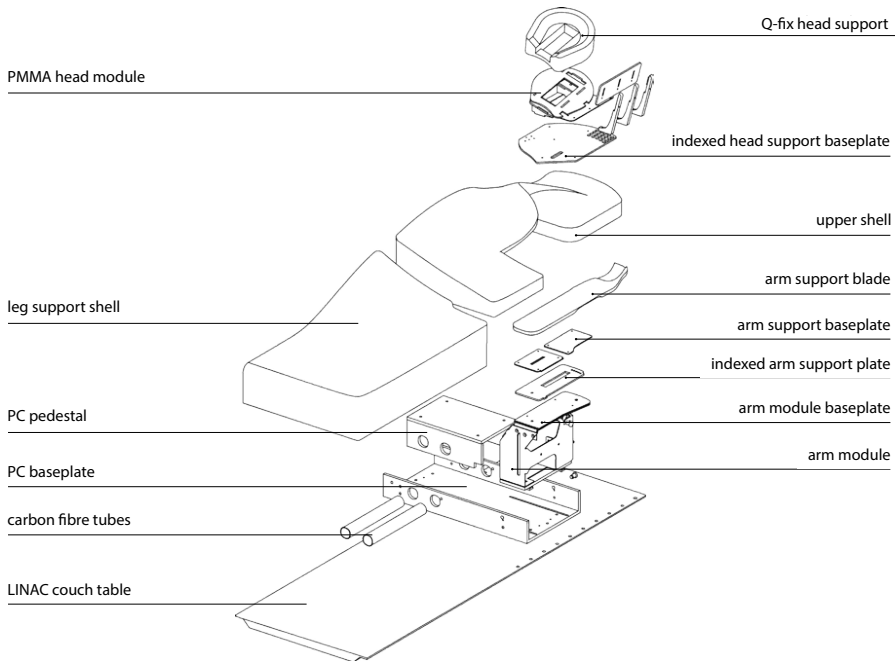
Exploded view of the last breast couch prototype (BC3-R).
